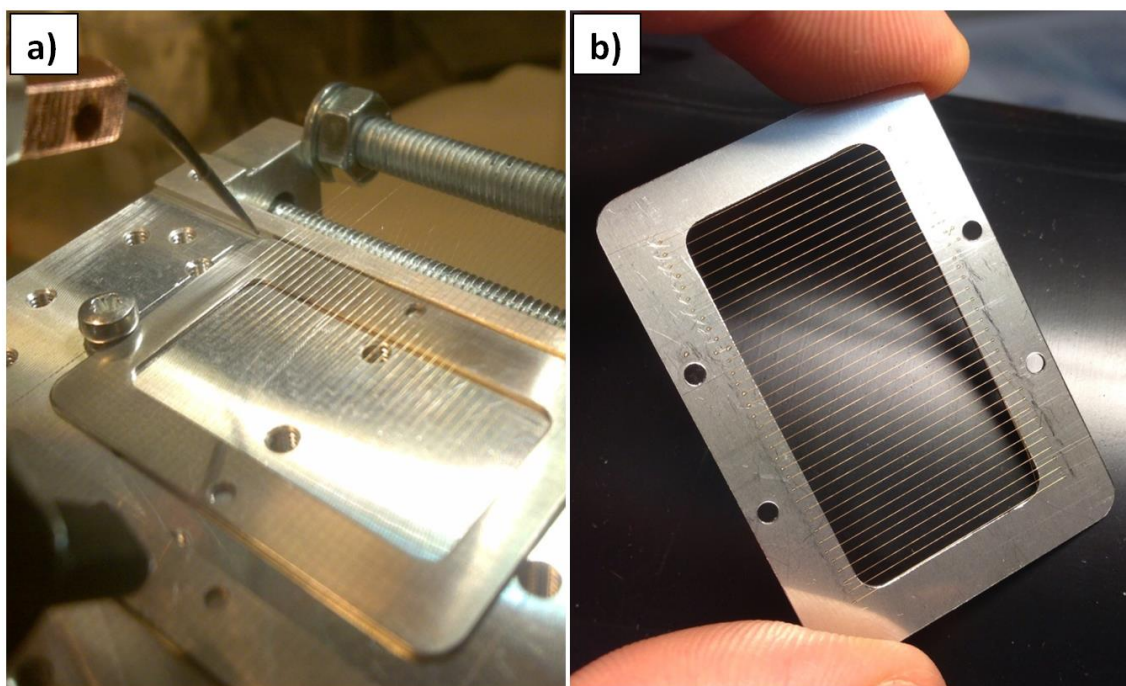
a) Point welding jig for the wire grid. Wire ($20\ \mu\text{m}$ in the figure) is being first wound around the jig where the pitch is determined by the pitch of the threads in both ends. Next, each wire is point welded from both ends to the frame holding the final grid structure. b) A completed grid with clean point welds for the T1 detector. Note the vertical wires, where electrons keep their 1D position better for the possible kinematic correction option (see also Fig. 4.1 for electron position information).
